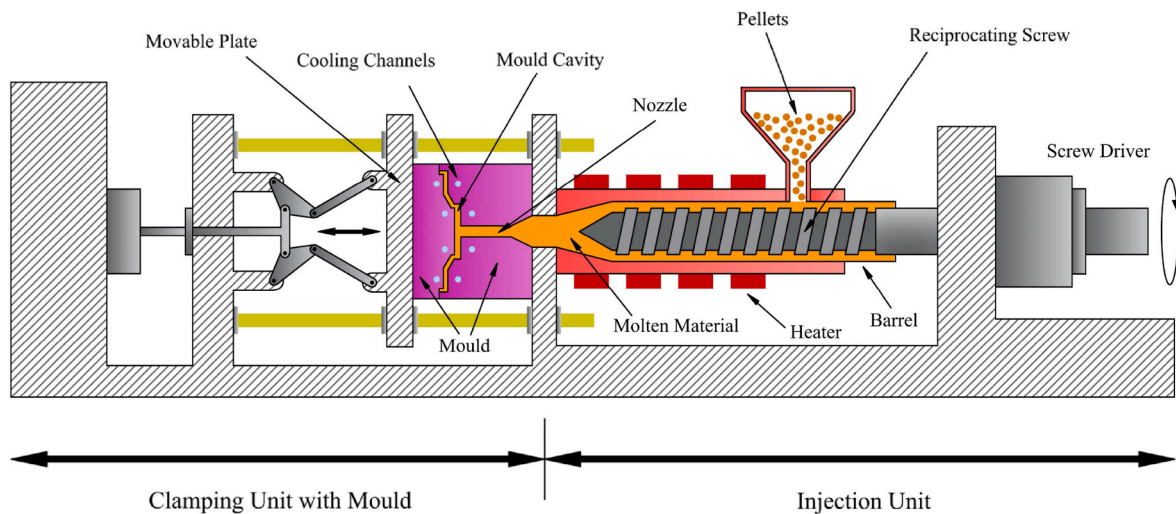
The schematic of a typical injection moulding machine, including the injection unit, clamping unit, and mould.
